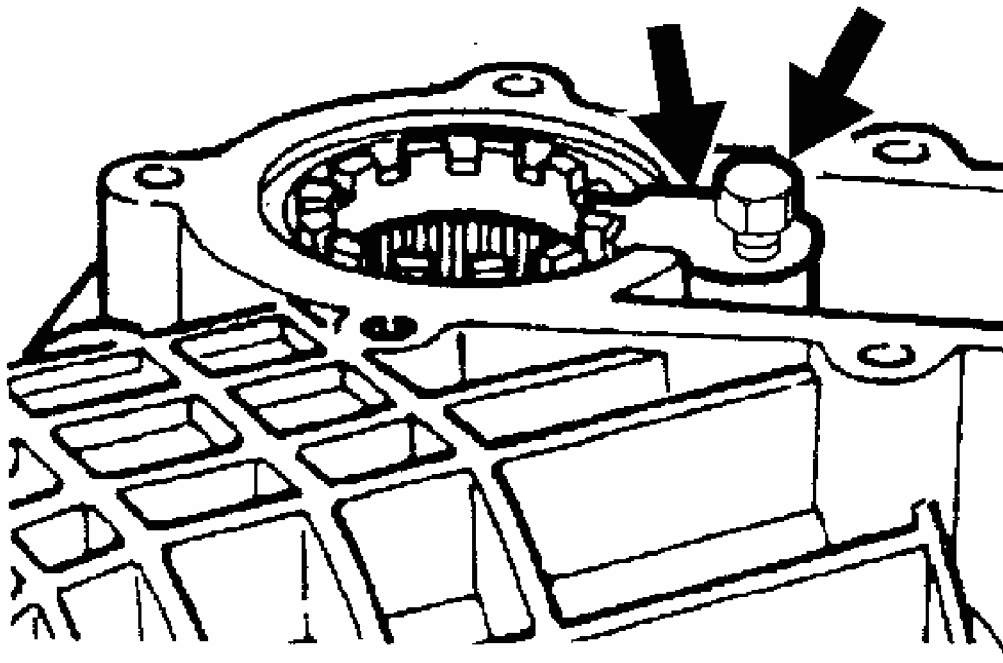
View Of Differential Adjuster Nut Lock Tab Bolts
